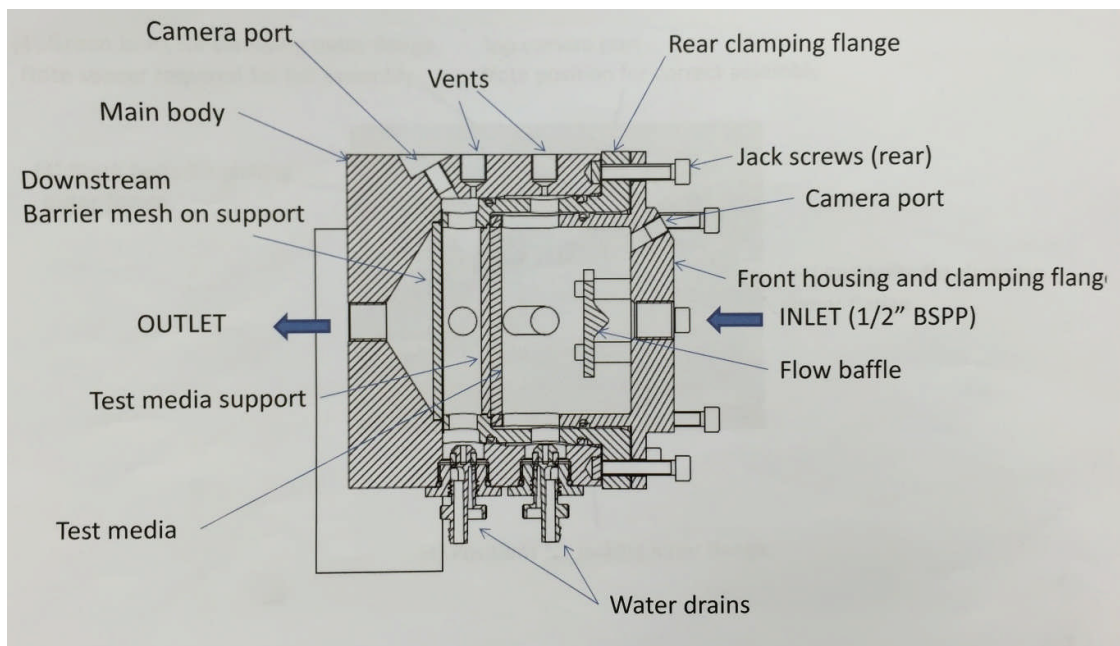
Design details of the new test filter housing with its three parts clamped together
